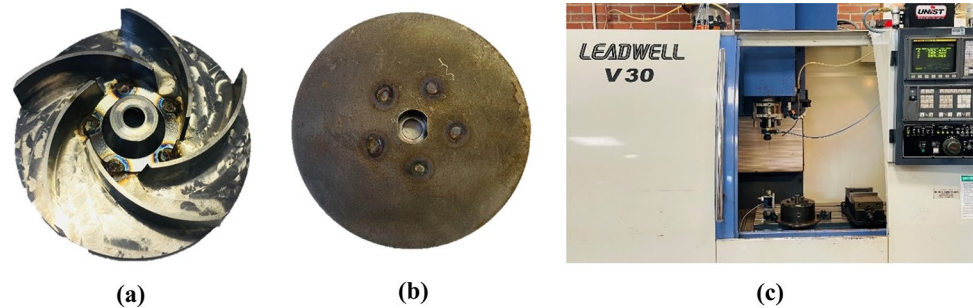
SM pump impeller - front (a), SM pump impeller - rear (b), and Leadwell V30 CNC milling machine (c)
